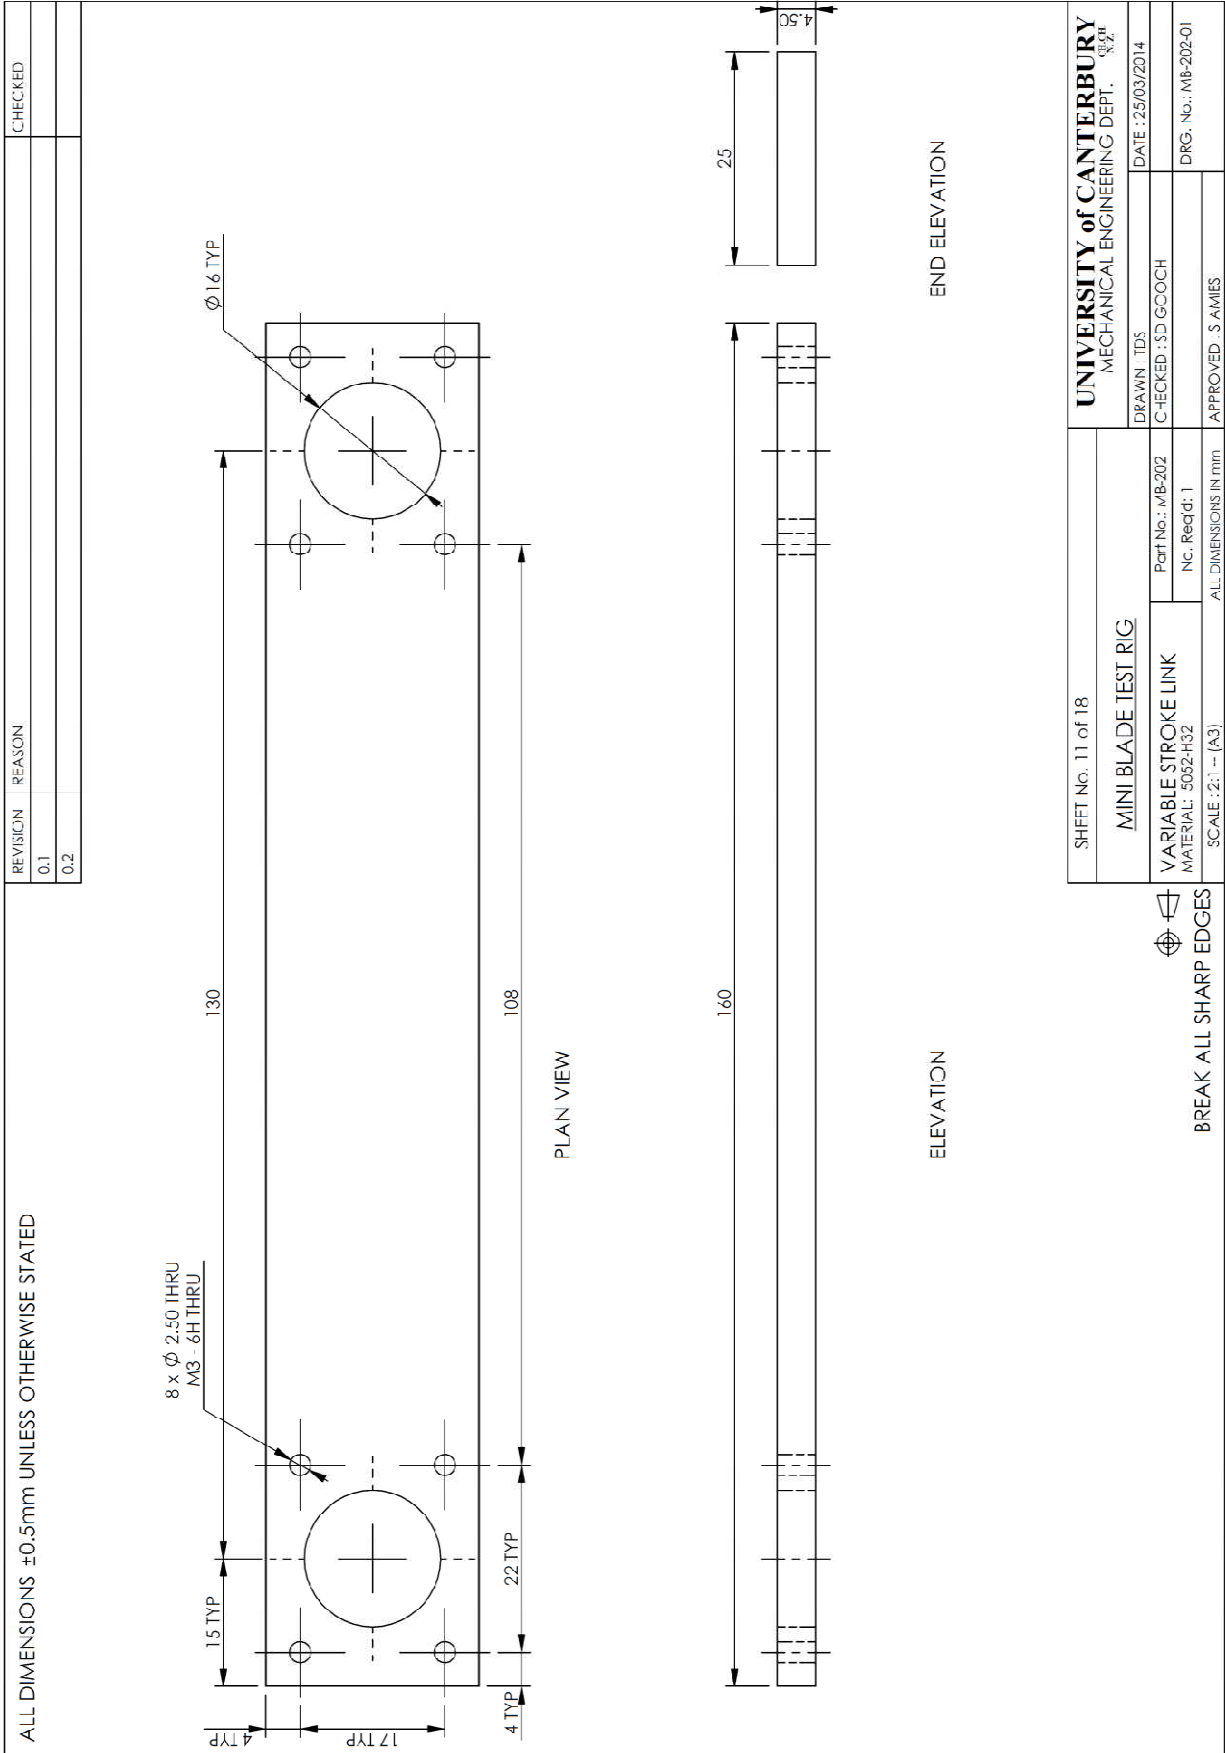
Manufacturing drawing for link 3 of the variable stroke test rig.
